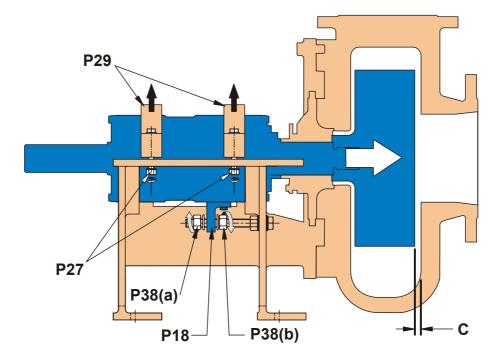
Adjusting the impeller inlet-side clearance
